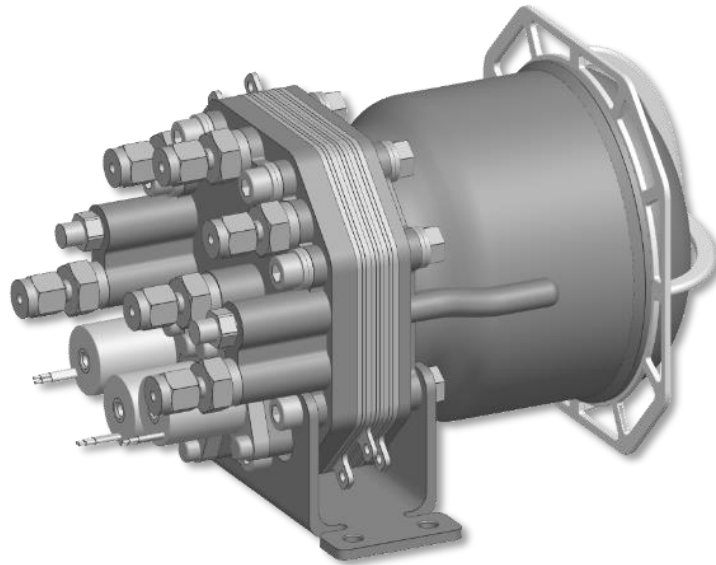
Assembly of the electrolyzer-gas-tank-unit with latch valves [23]
